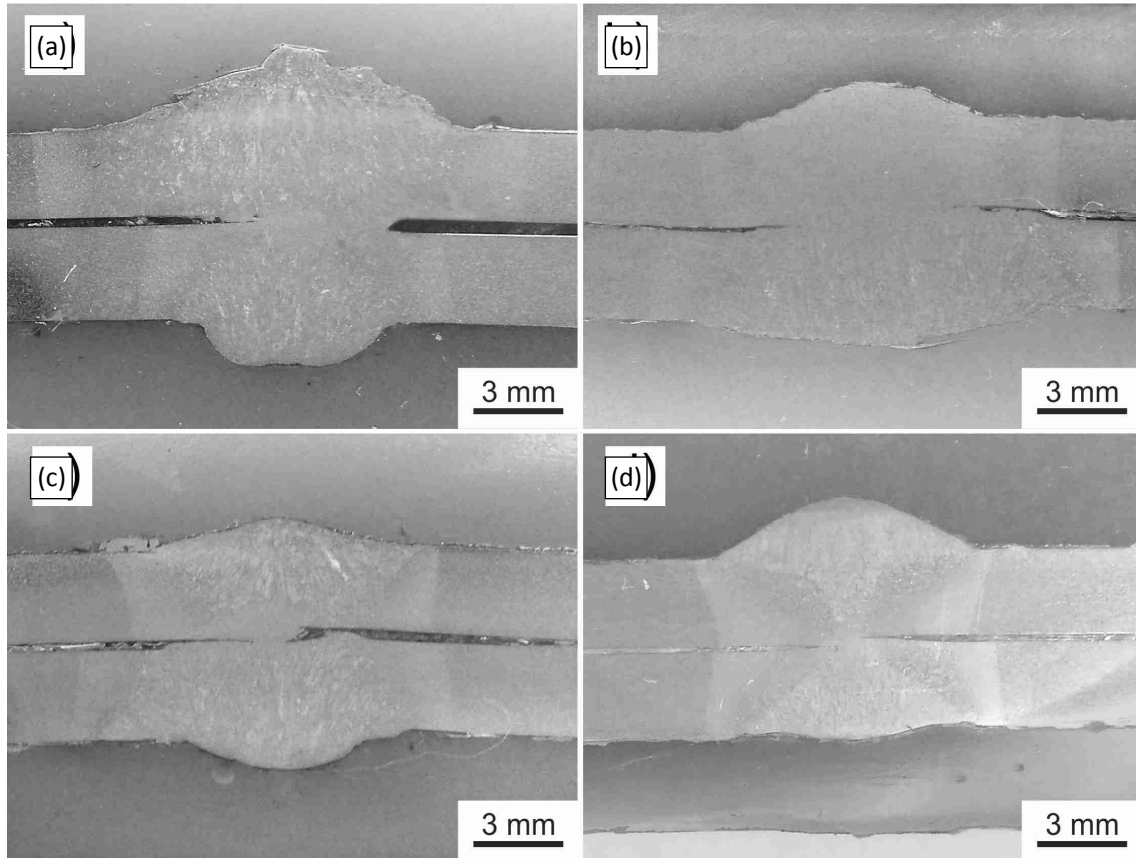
Specimens welded with C1 shielding gas: (a) specimen 1, (b) specimen 2, (c) specimen 3 and (d) specimen 4
